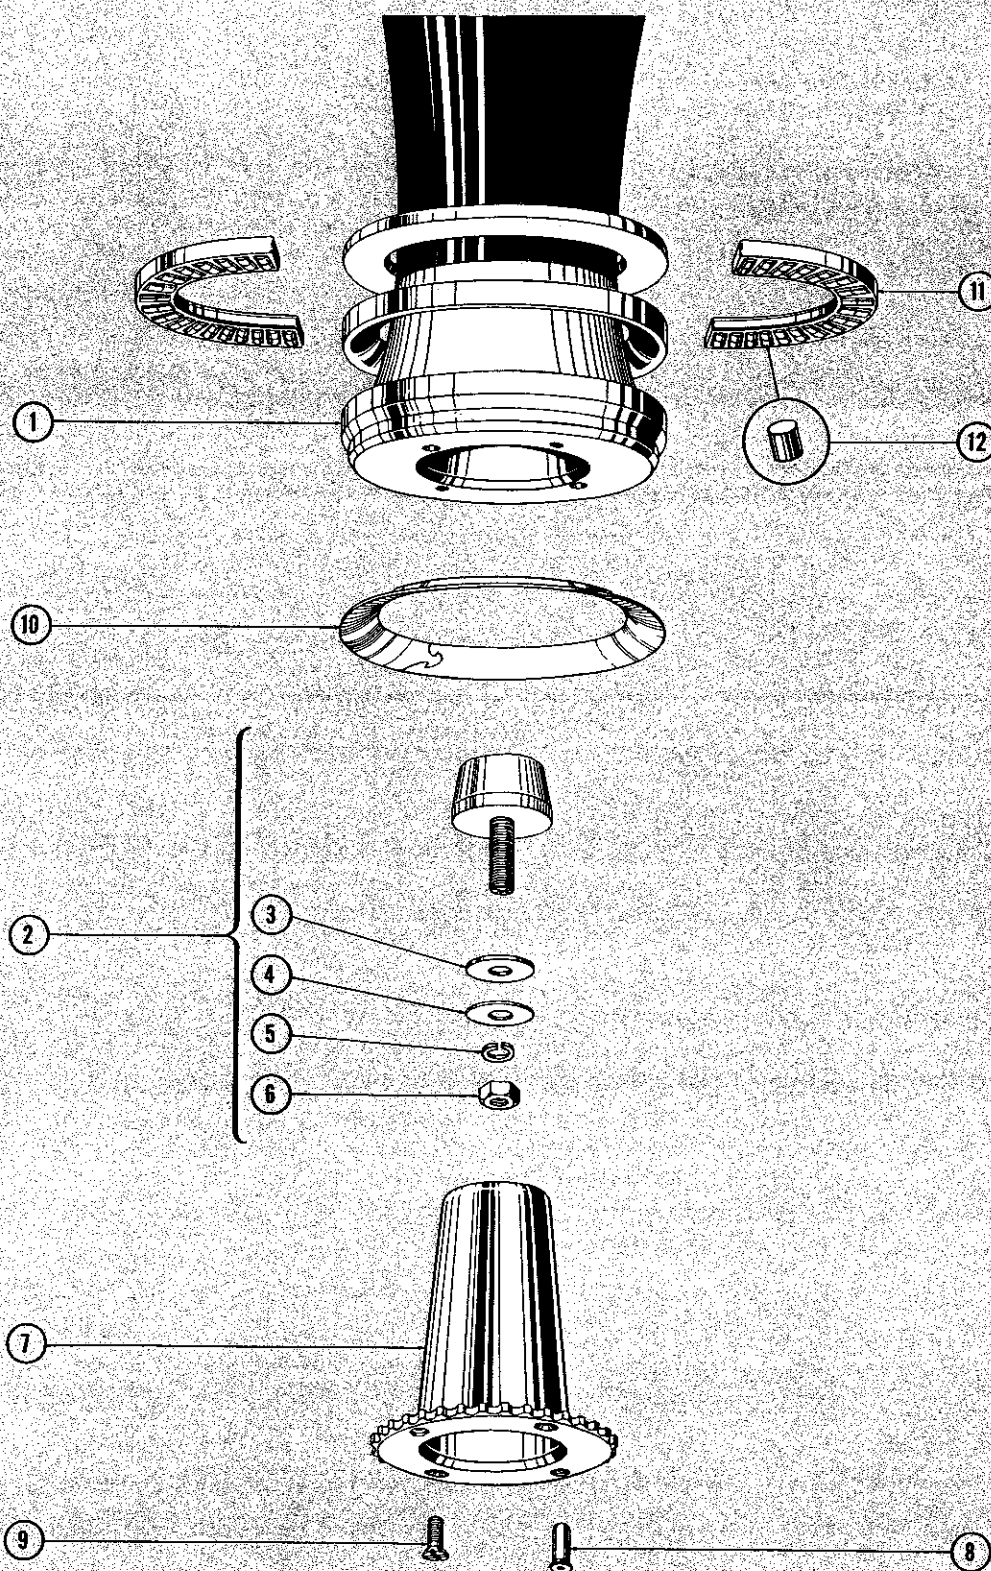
Counterweight Type "D" Shank Blade Assembly
